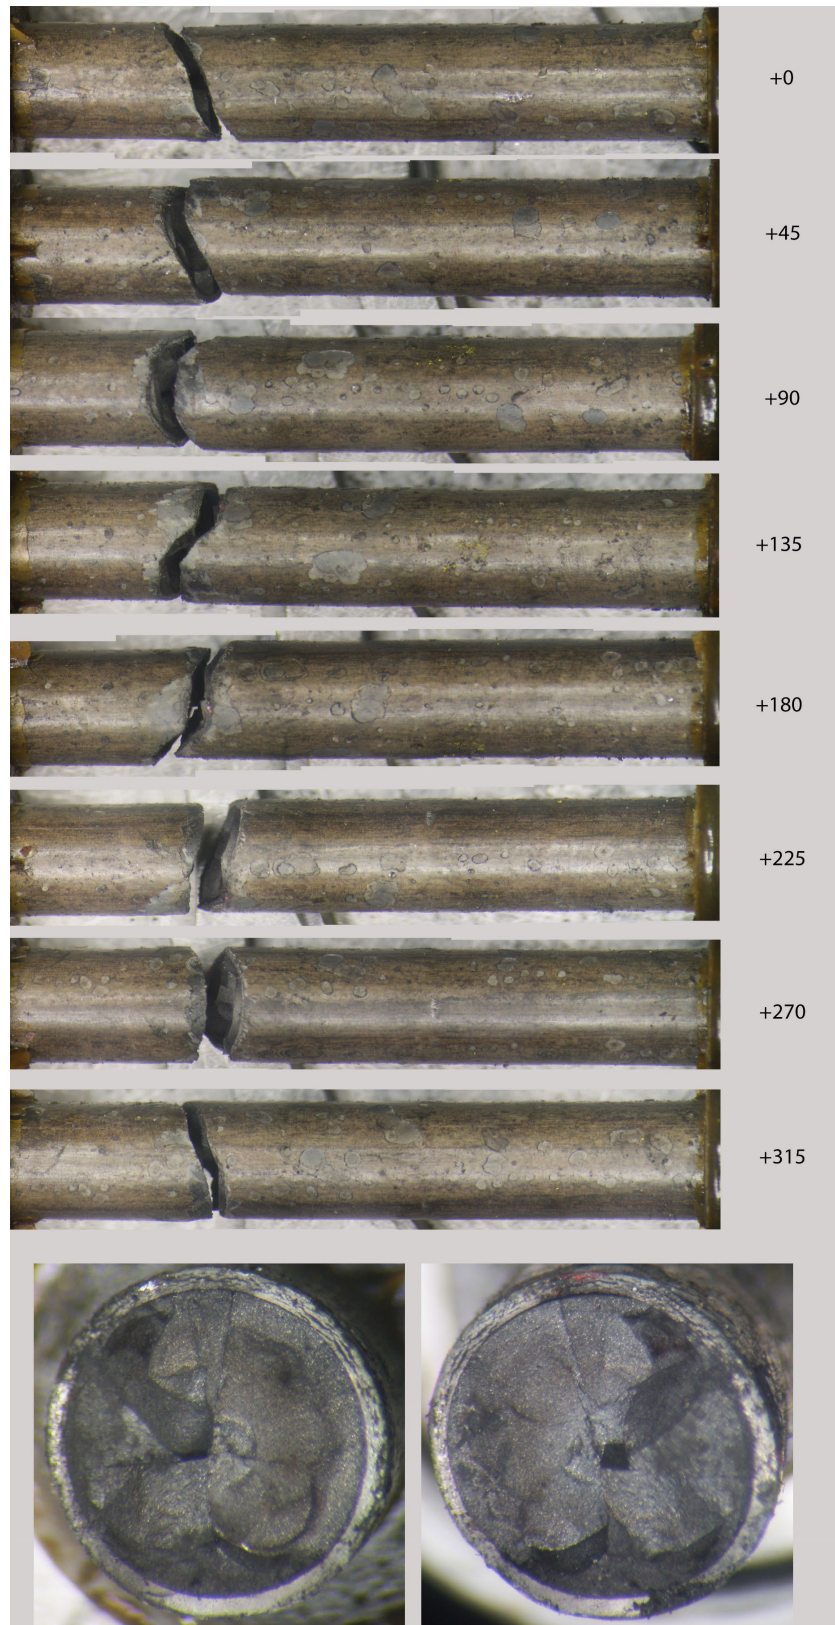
3A1F05-3367-3520 post-fatigue test condition.
